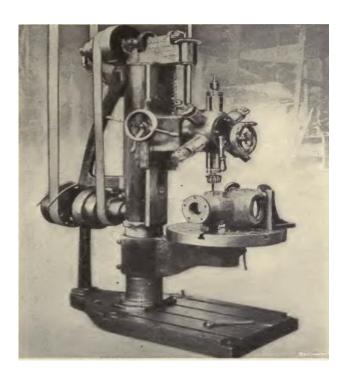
Turret type of drilling machine in which turret revolves in vertical plane
